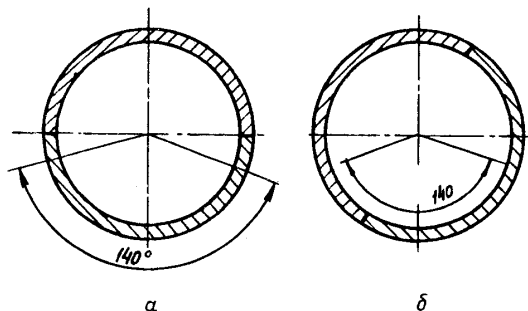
Layout of welded joints in the lower part of the pipeline equipment:
